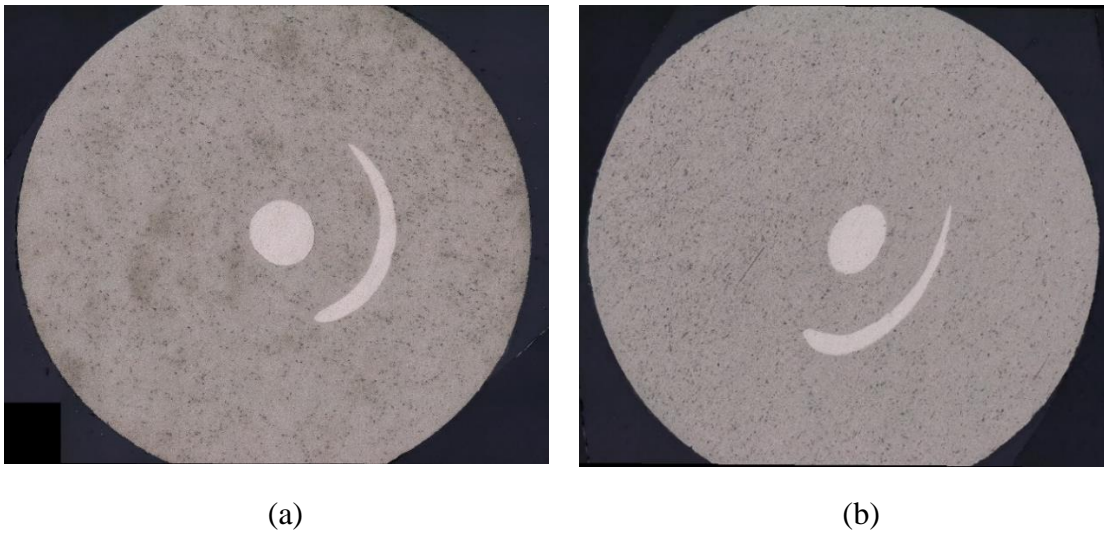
Cross sections from extrusions performed at 300 rpm and 40 mm/min. (a) flat die extrusion. (b) scroll die extrusion
